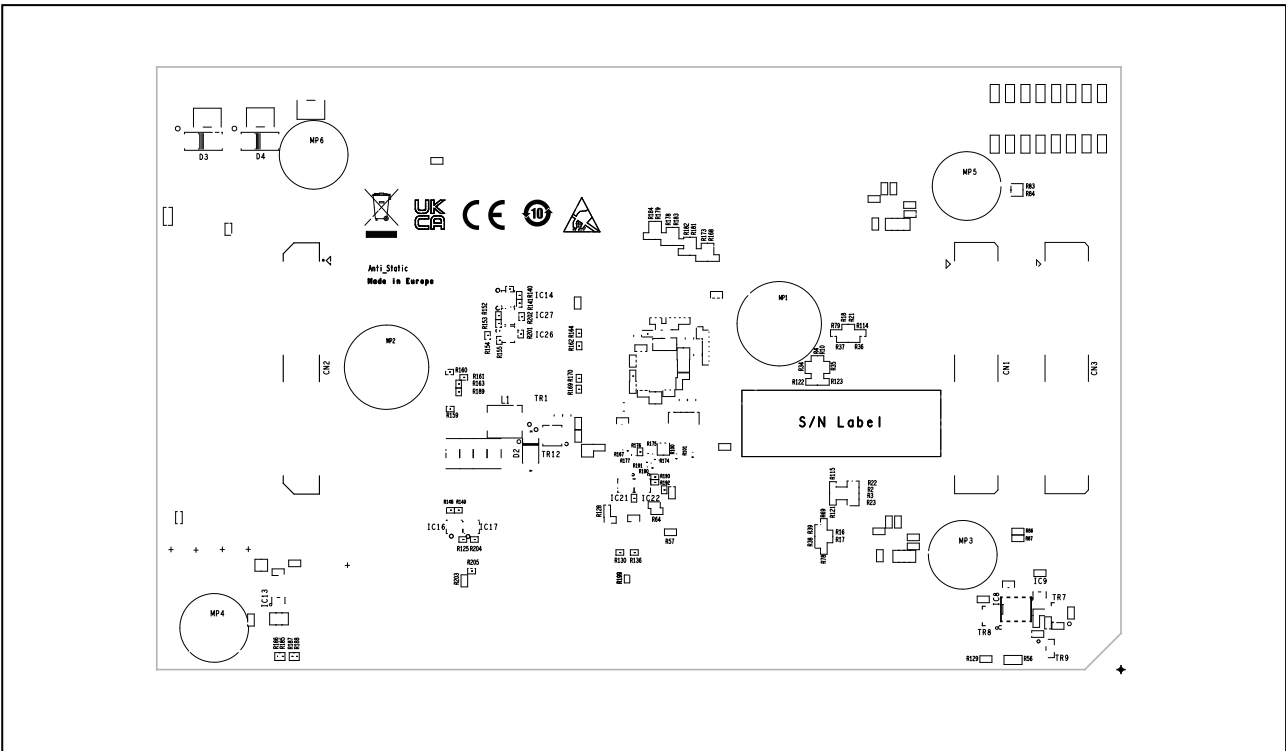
D018177_06_V02 Placement of connectors on bottom side
